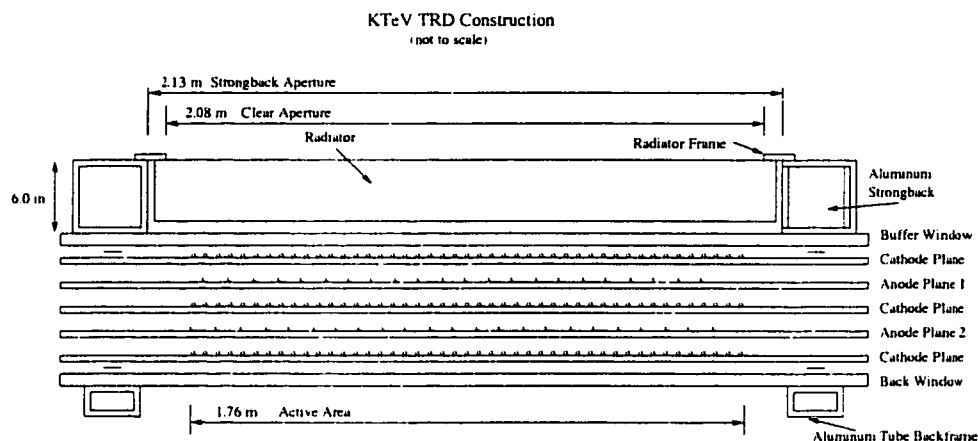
A diagram showing the major steps in the construction of the TRD chambers. The primary mechanical support comes from an aluminum strongback, which is 6" aluminum square hollow channel. An aluminum frame on which is stretched the two aluminized mylar windows comprises the C2F6 buffer volume. The steel-G10 laminated wire frames, both holding the wires and providing the anode-cathode separation distance, are stacked next. Finally, the rear window is added followed by an additional aluminum tube support. These elements are sealed with RTV sealer and screwed down to uniform tolerances.
